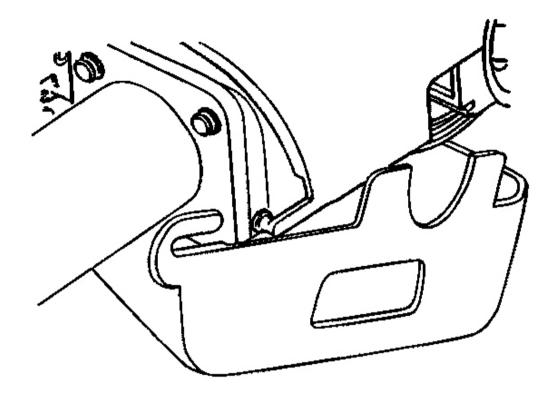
Disengaging Upper Trim Cover Courtesy of GENERAL MOTORS CORP.
